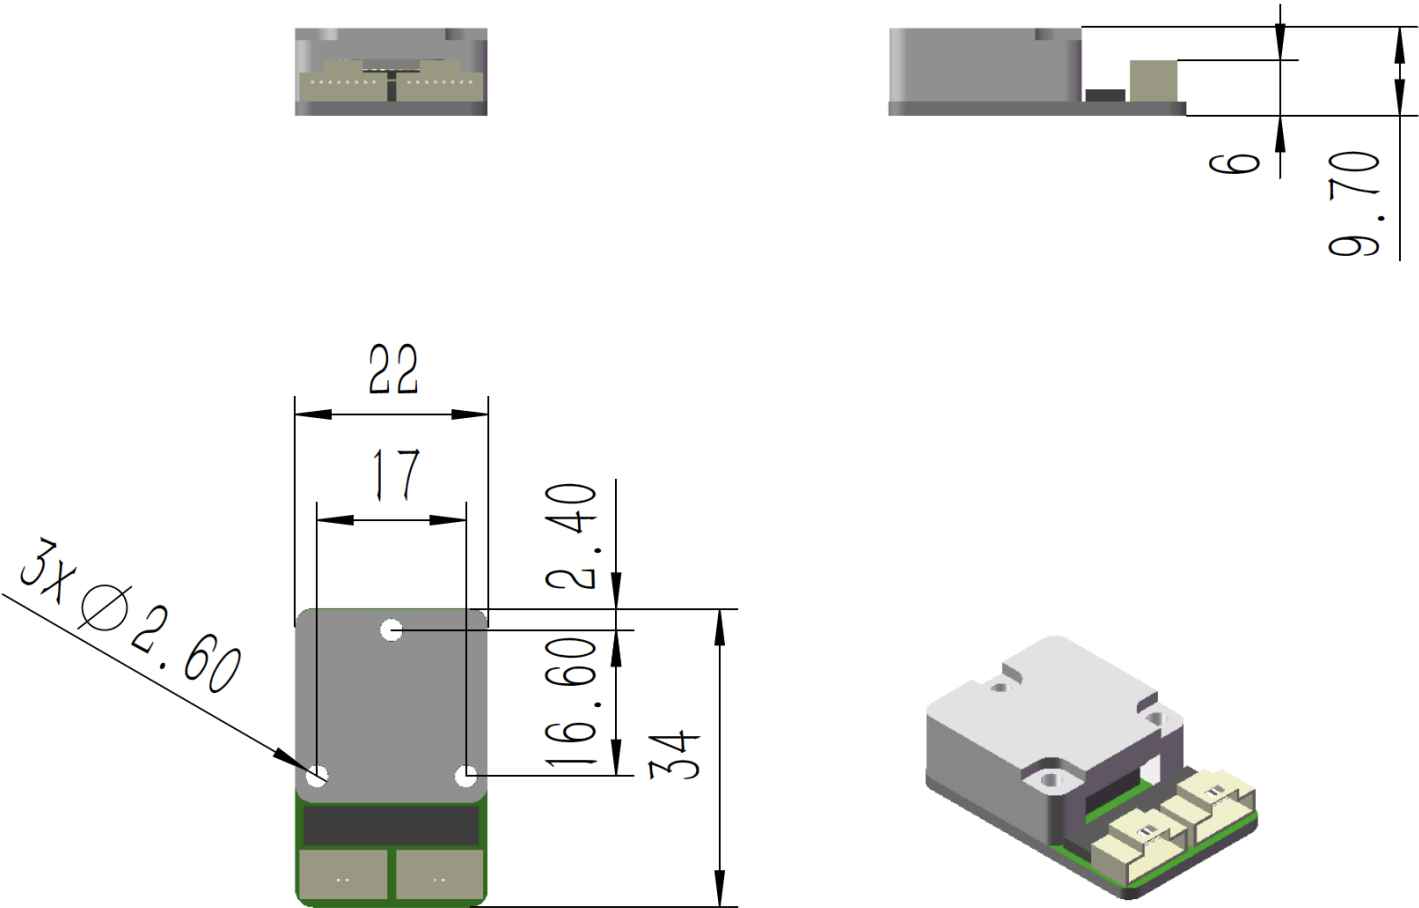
EVAL HI12XX-MI1-100 mechanical dimension
